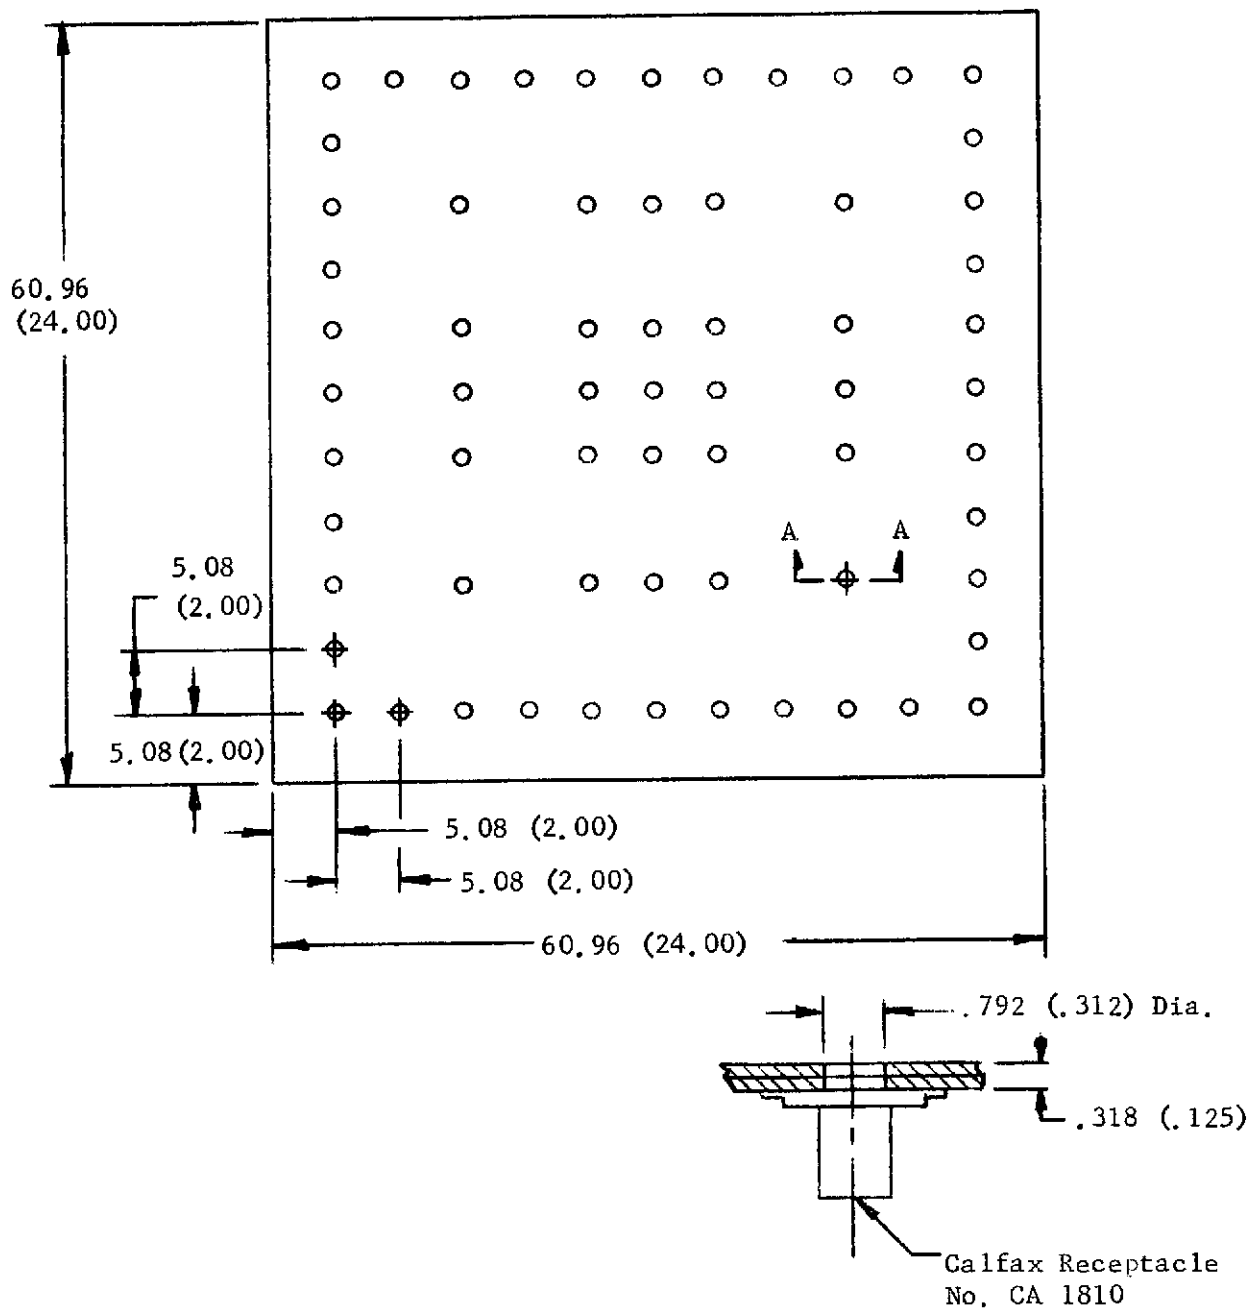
FASTENER PATTERN - WALLS AND BACK
